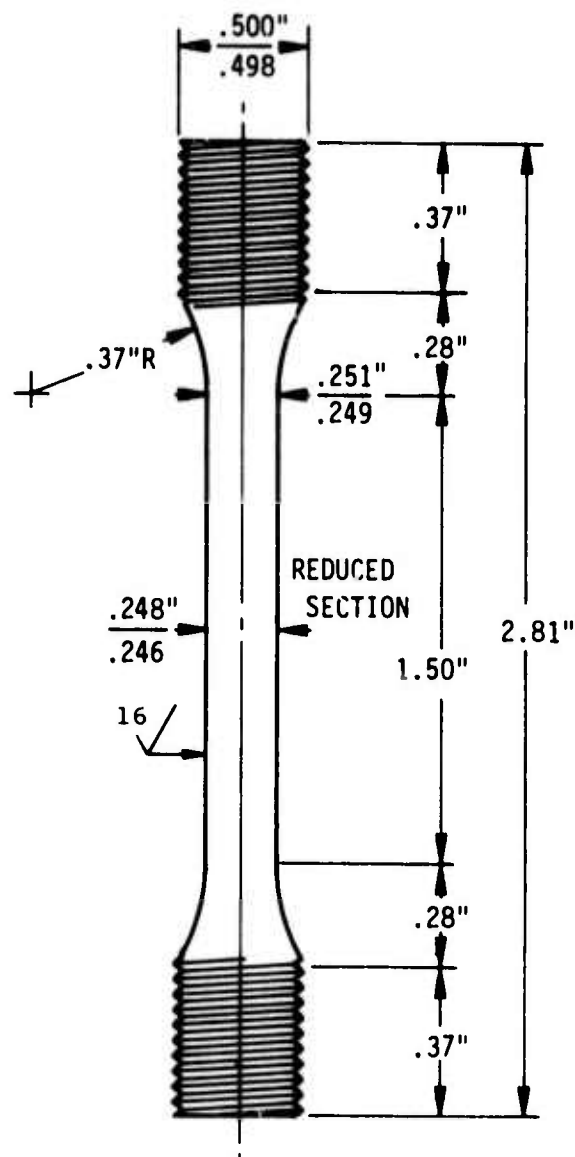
Tensile Specimen (1 in. = 2.54 cm)
